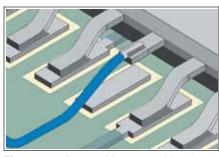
Acceptable* Wire soldered to clipped component lead. +
